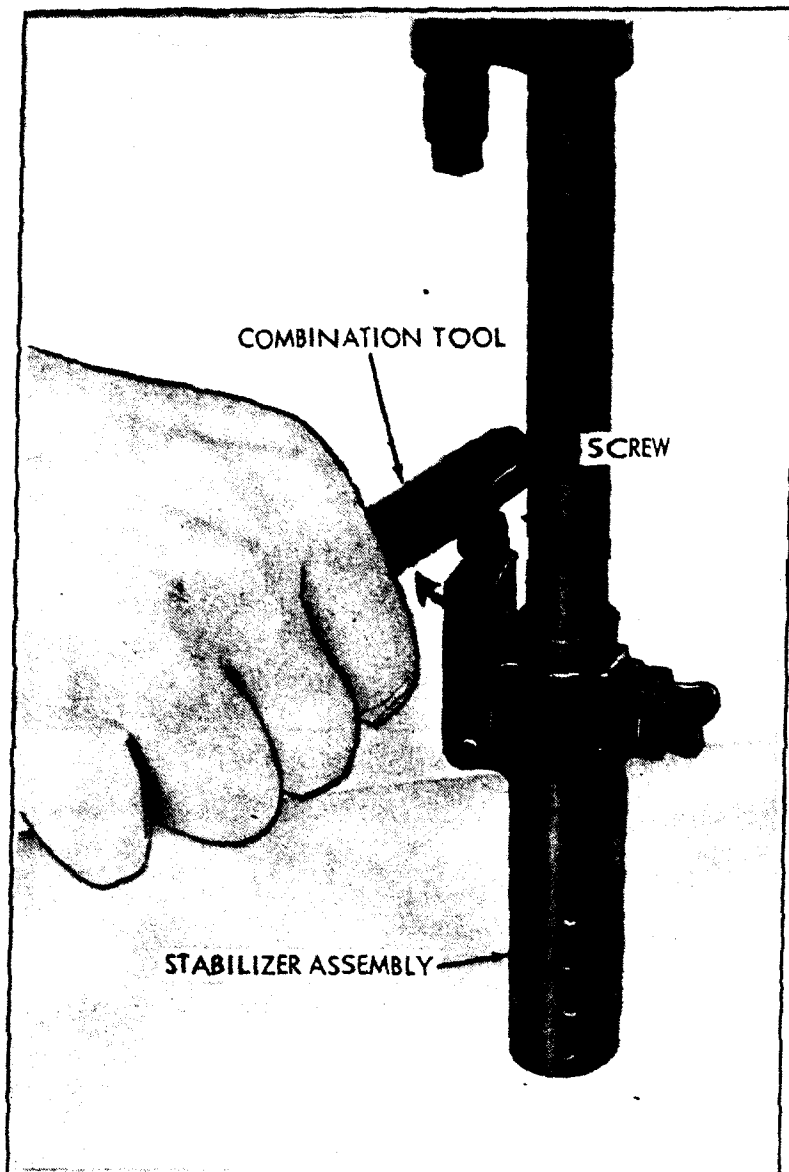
Disassembly/assembly of barrel and receiver group.
